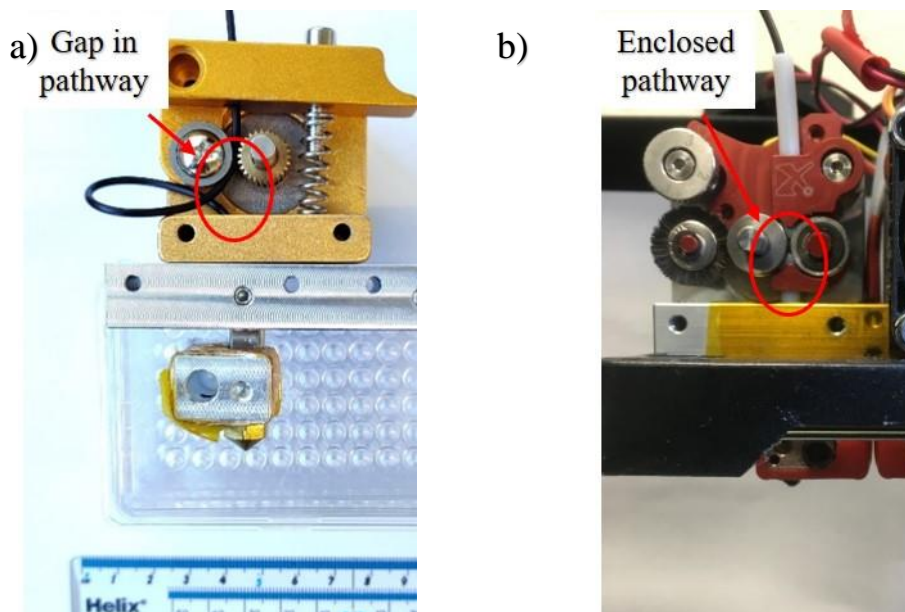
a) Default extruder designed for rigid materials with the apparent gap between drive gear and hot end. b) Replacement of Flexion extruder with enclosed path to the hot end fitted to the printer.
